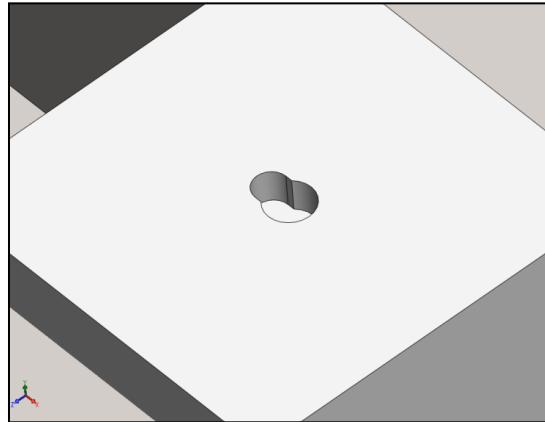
A 2.5 mm drill bit would then be used to mill a 2.5 mm deep slot from 0.875 mm to the left of center to the center of the previous hole.
